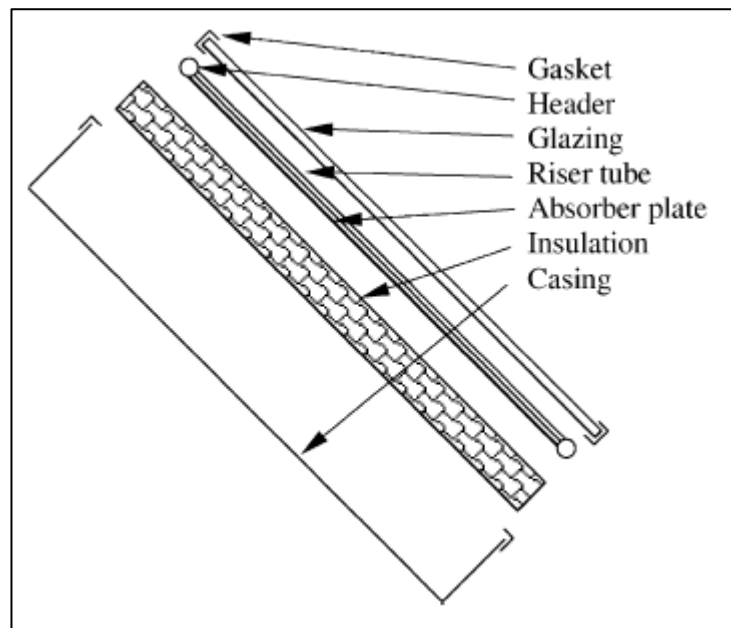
Exploded view of a flat plate collector (Kalogirou, 2004, p.241)
